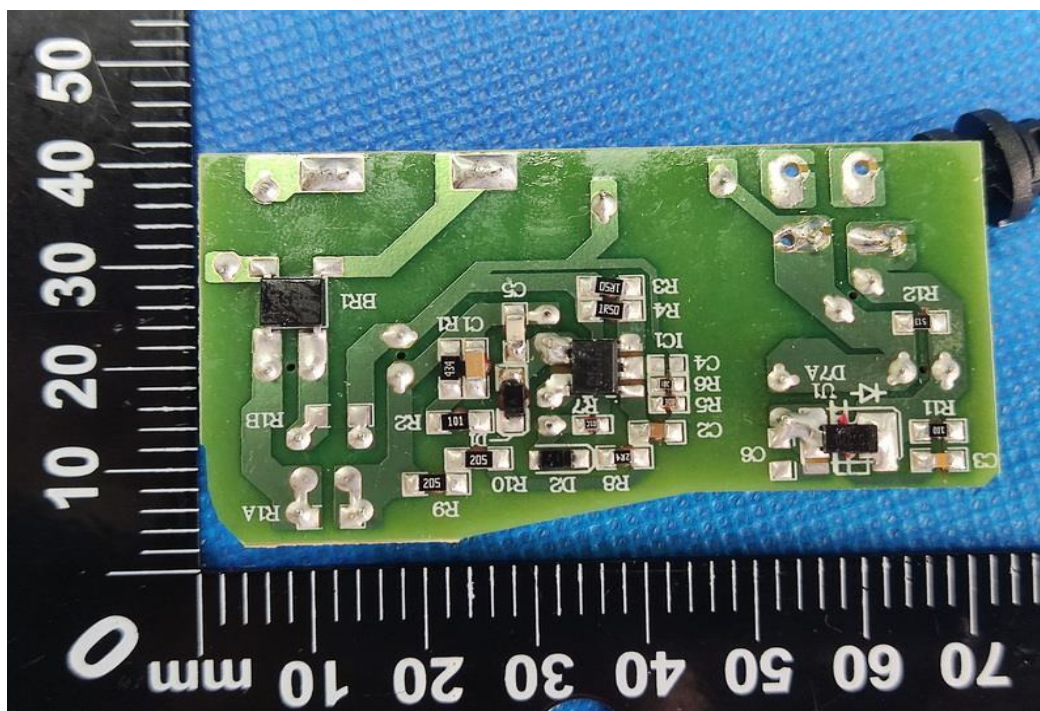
PCB view with D7A (without U1+C6), for PCB layout PCB-T484-K
